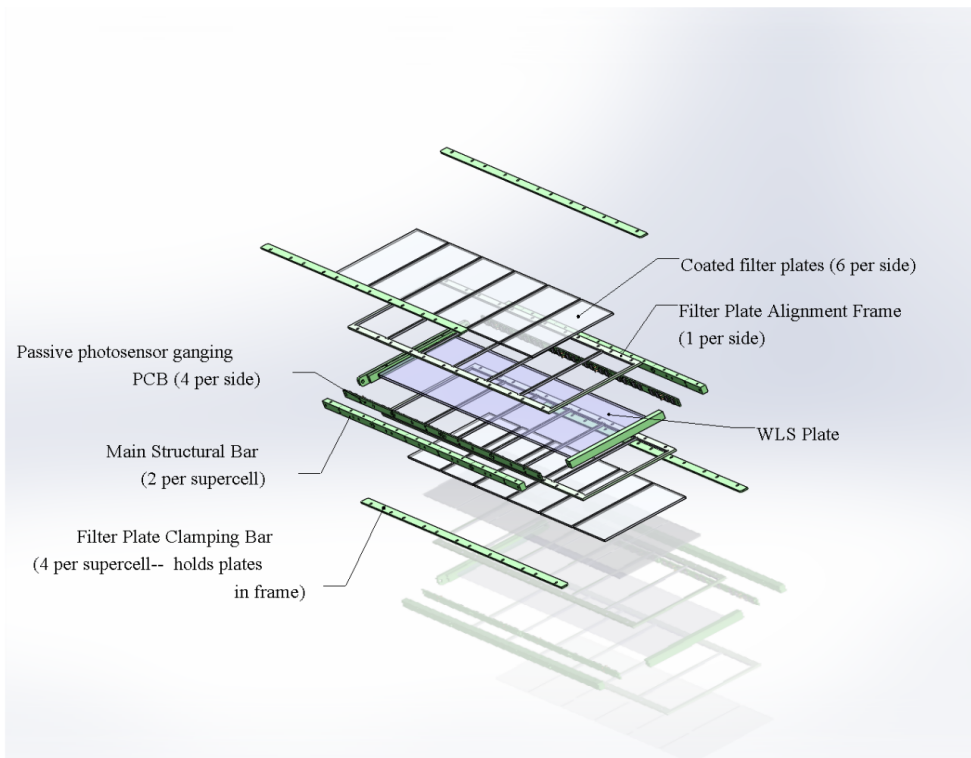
Detailed exploded view of X-ARAPUCA supercell. Figure from [83].
